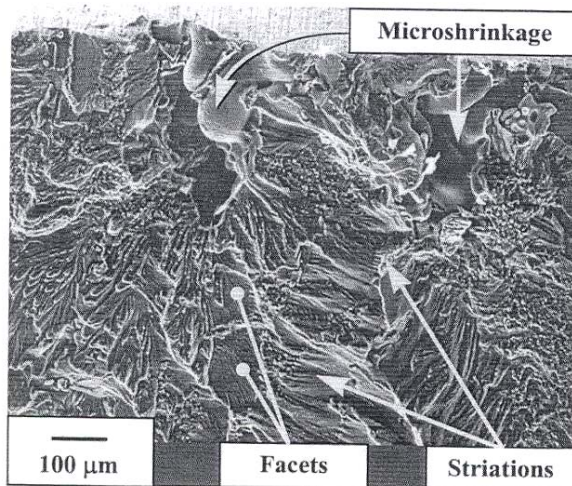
Typical fracture surface of the pore-containing W319 fatigue specimens [5].
